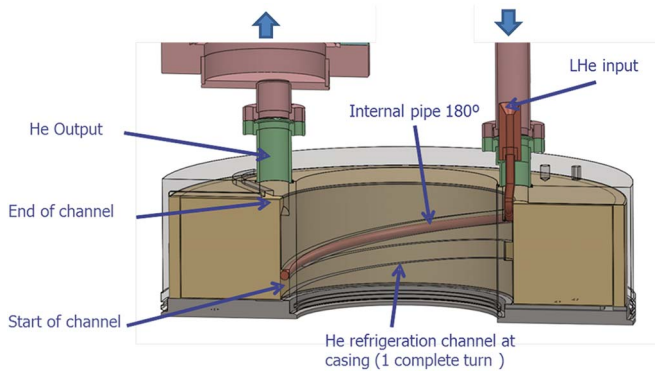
Detailed view of coil and casing for the mock-up set-up.
